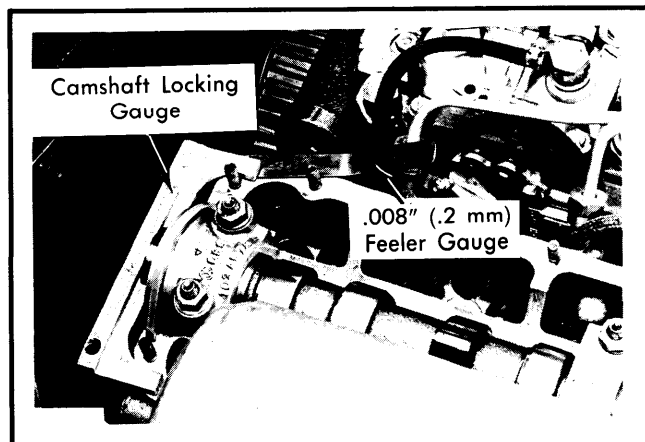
Using Camshaft Locking Gauge to Set Engine Timing
